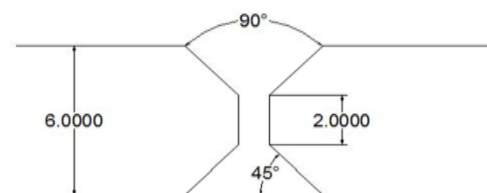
Double V groove used for GTAW(all dimensions are in mm)
